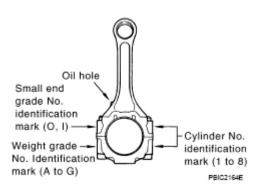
Identifying Cylinder Number Marks On Connecting Rod
